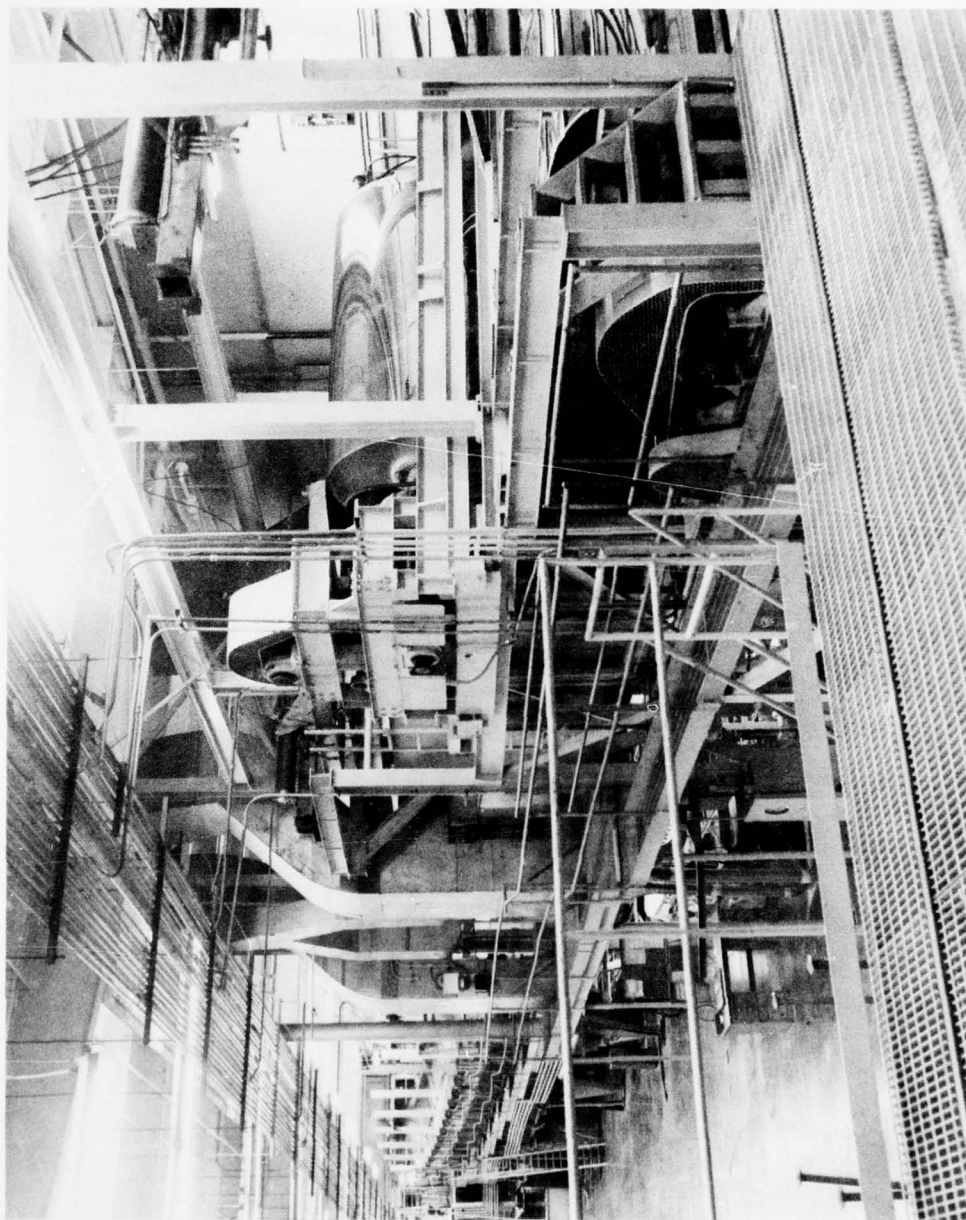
Machine developed by Swedlow, Inc., for continuous casting of acrylic sheeting. (Photograph by Swedlow, Inc.)
